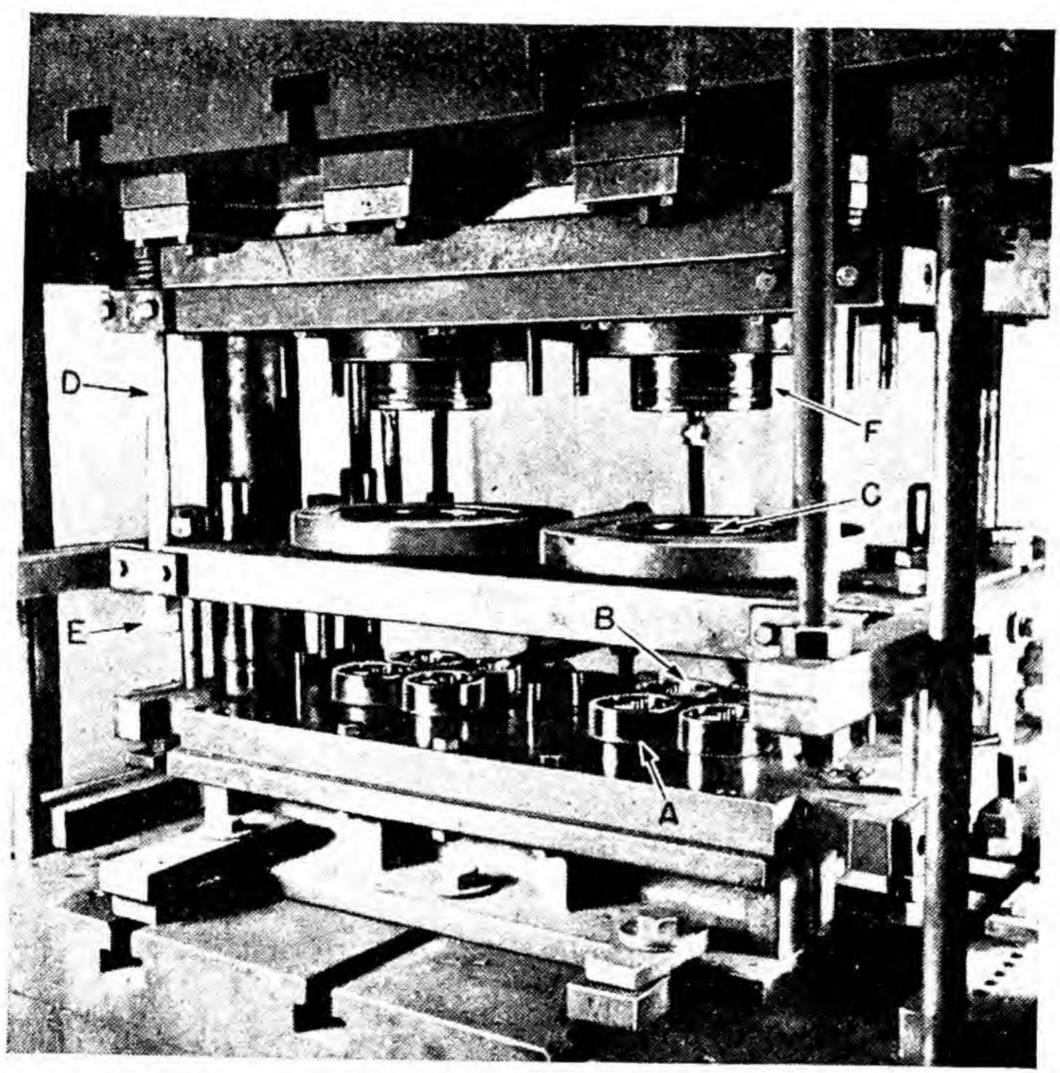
A press set up for transfer molding. (Bakelite Corp.)
